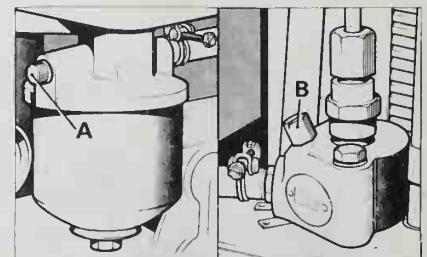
Air bleed valves on (A) fuel filter mounting bracket and (B) fuel pump.
